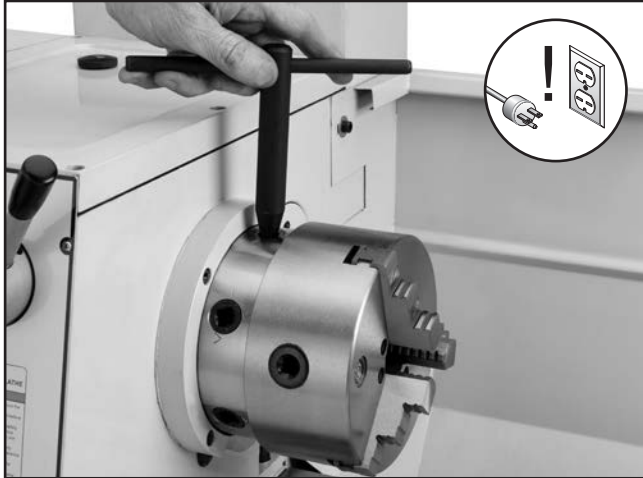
Chuck key positioned to remove a typical camlock mounted chuck.
